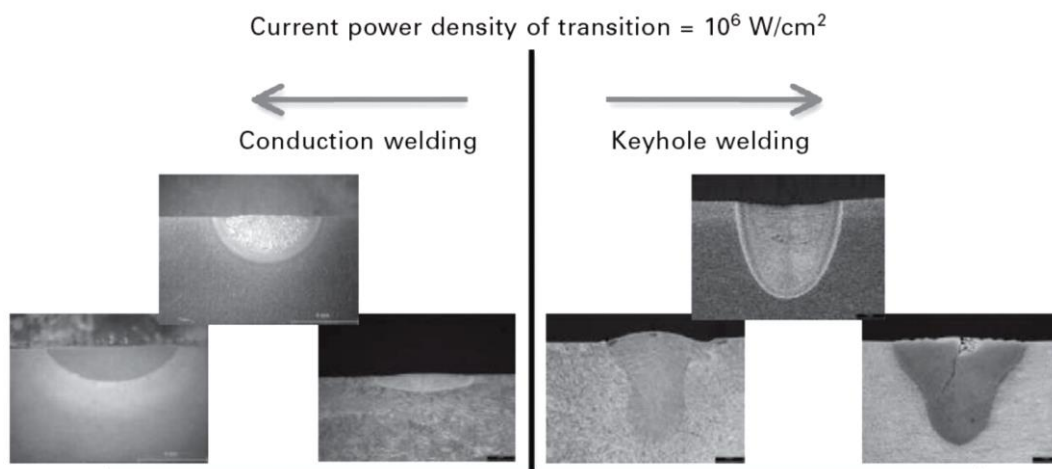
Conduction vs keyhole mode of laser welding [37].
